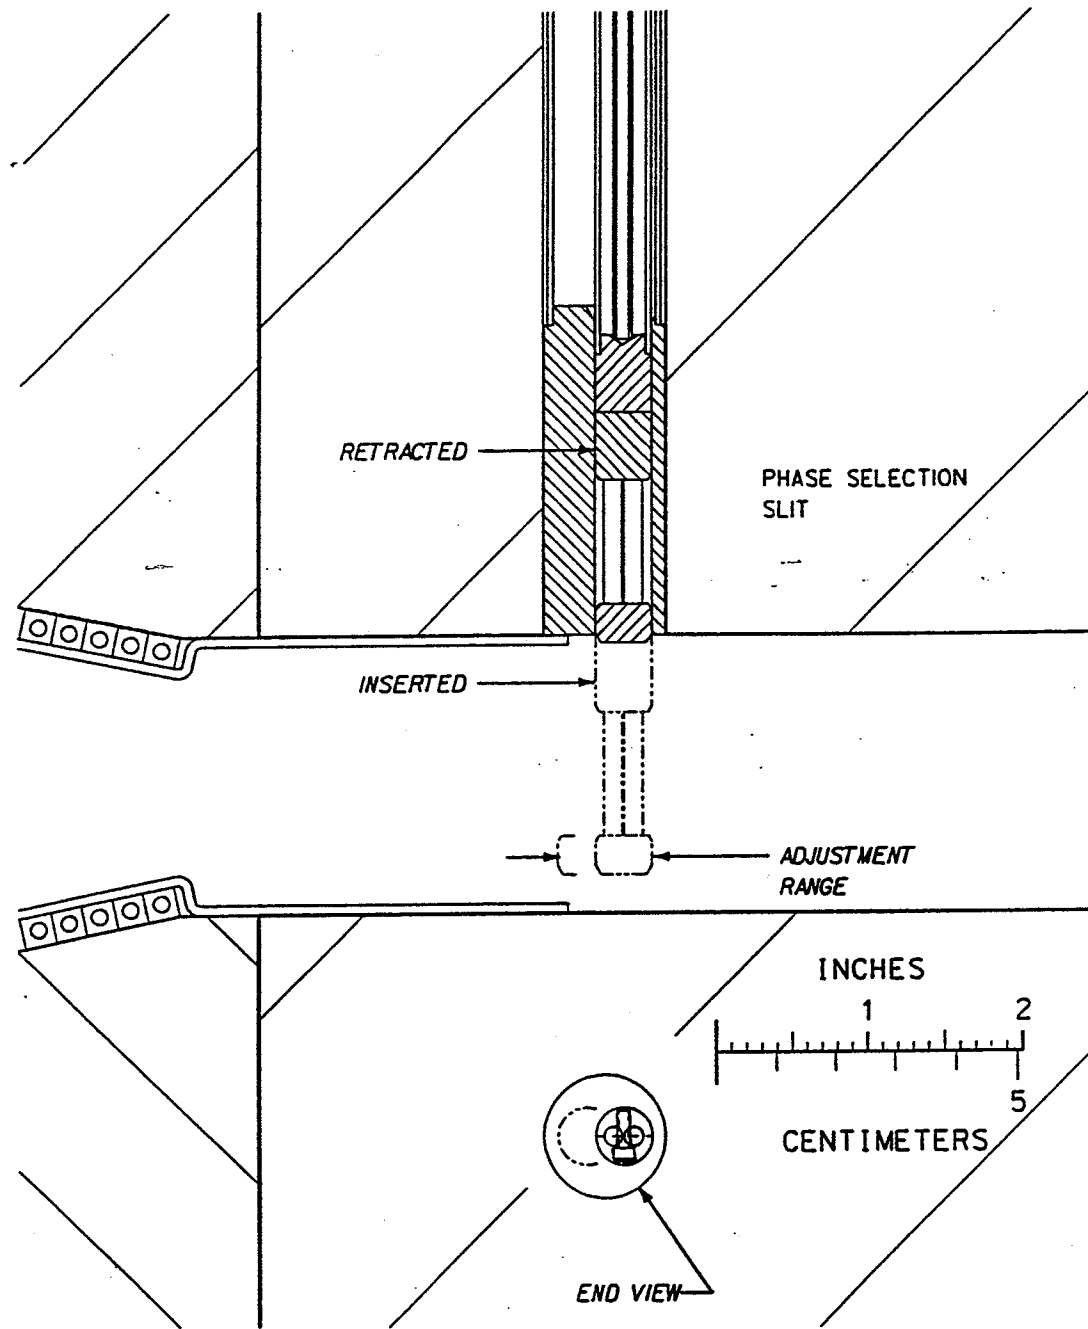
Mechanical drawing showing details of one of the two phase-slits which will be used in the 250 MeV cyclotron. Each slit can be retracted or inserted remotely and moved in radius by rotating the outer mounting tube while holding the slit proper with no rotation.
